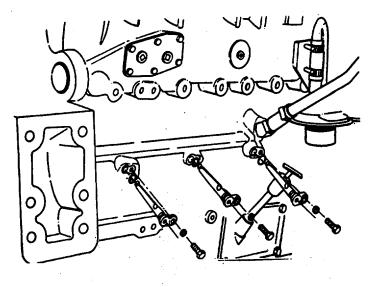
<u>Piston Coolin2 Nozzles</u>.
